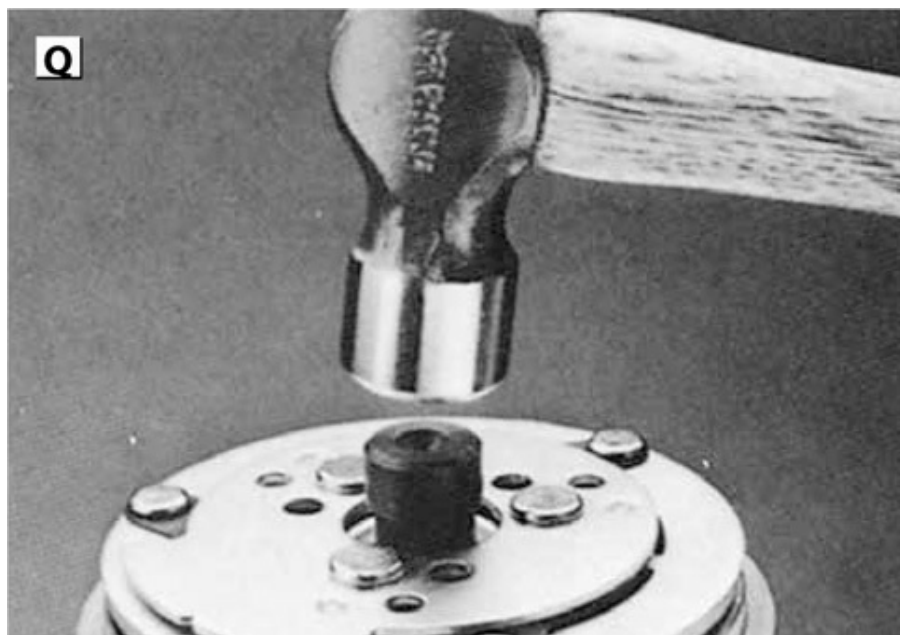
Q. Using the shaft protector, tap the front plate onto the shaft
